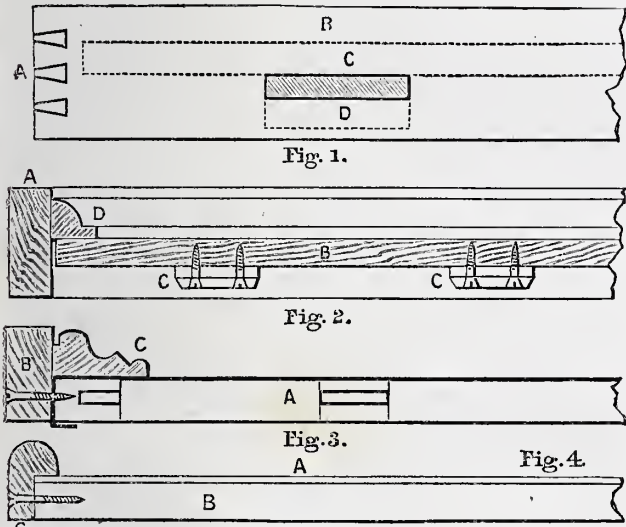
Mode of making Frame for Sign-Board—A, Dovetailed Frame; B, Space within Frame for Moulding; C, Board; D, Ledge. Fig. 2.—Section of Sign-Board—A, Frame; B, Board or Panel; C, Ledge; D, Ovolo Moulding fixed to Frame. Fig. 3.—Covered Sign-Board—A, Frame of Styles, Rails, and numerous Muntings; B, Capping screwed to Frame; C, Large Panel Moulding fixed to Capping. Fig. 4.—Glazed Sign-Board—A, Plate Glass; B, Frame; C, Moulding fitted to Frame.
